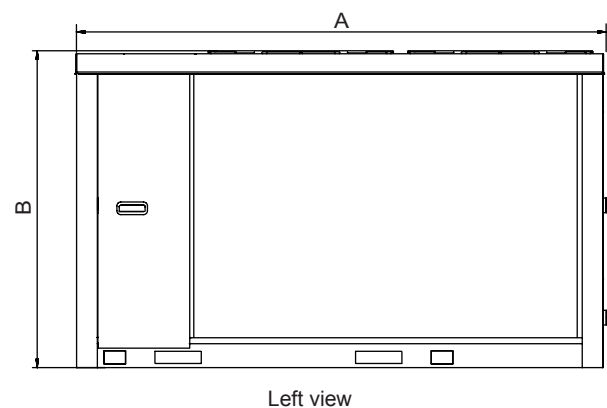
Outline dimensional of KEM-30 DNS3
